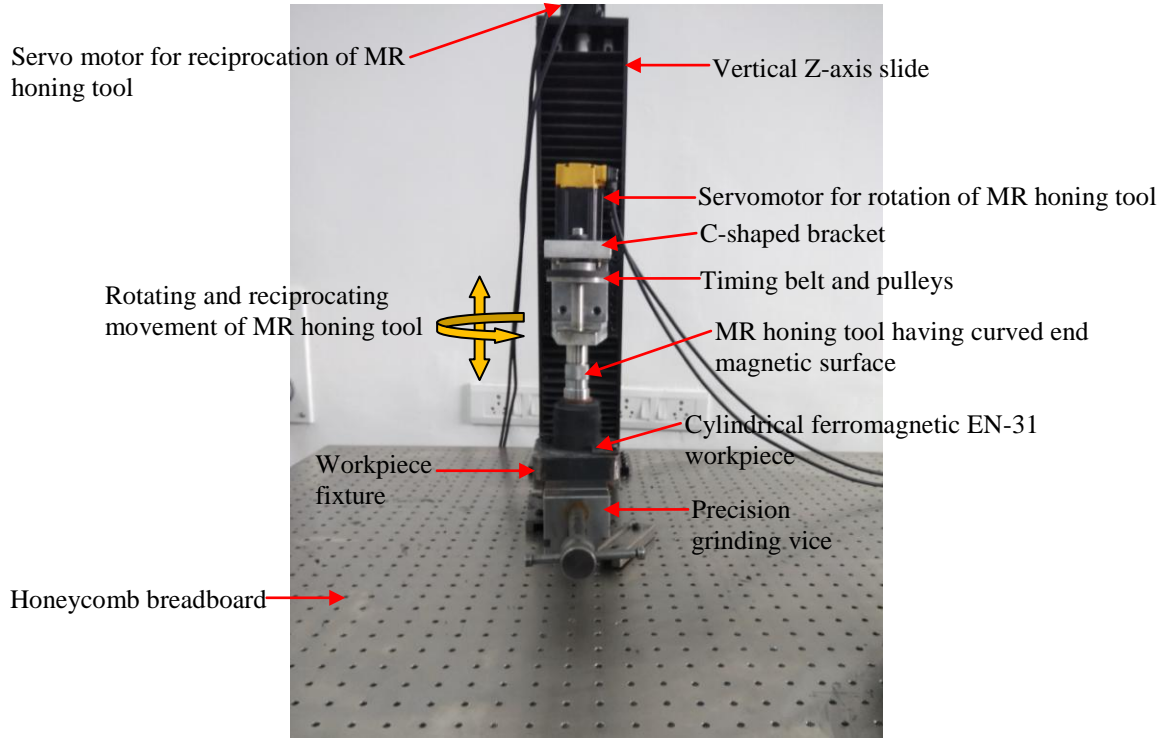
Photograph of the developed magnetorheological honing setup during internal surface finishing of ferromagnetic EN-31 cylindrical workpieces. The workpiece material used for cylindrical internal finishing was EN-31 (ferromagnetic in nature) having the hardness of 63 HRC and is used for manufacturing cylindrical dies and moulds for various cylindrical plastic products (Martinez-mateo, 2011). The experiments were performed on the cylindrical EN-31 workpiece which consists of two key type slots arrangement as shown in Fig. 4.5 (a). For measuring the surface roughness as well as better observations of
